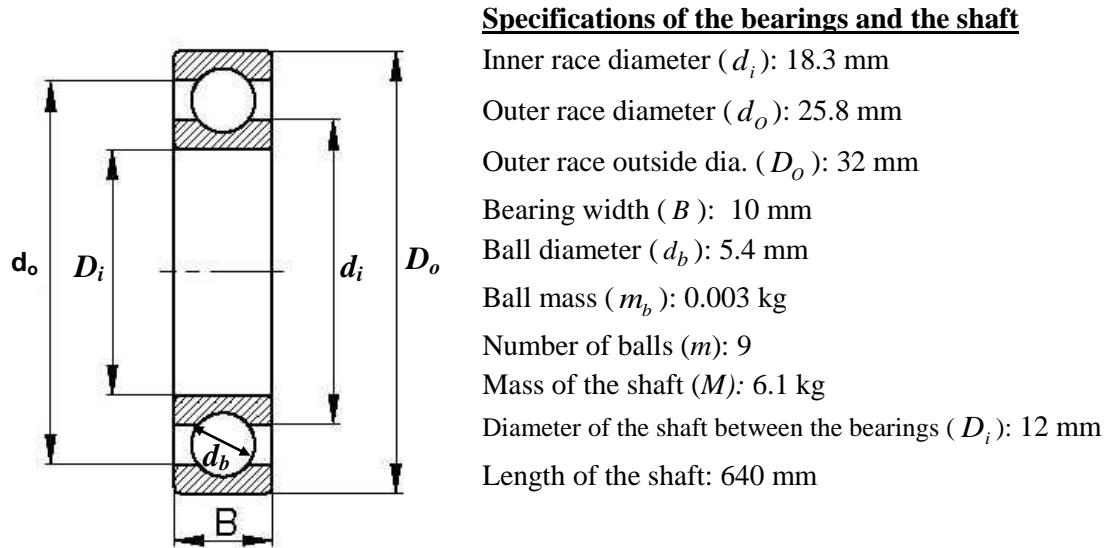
Dimensions of the FAG 6201 type ball bearing and the shaft
